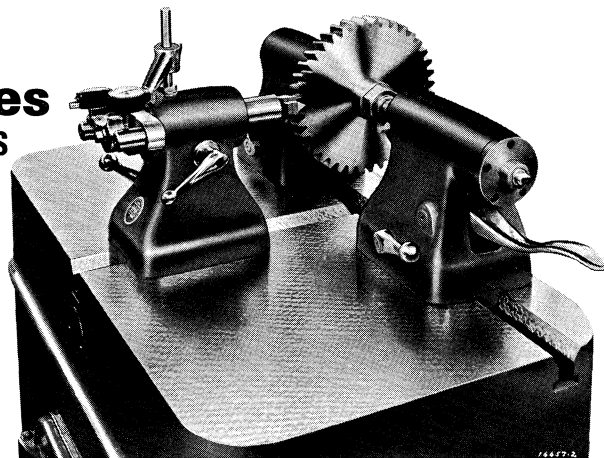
The SIC head that checks for helix angle, wobble and eccentricity.
